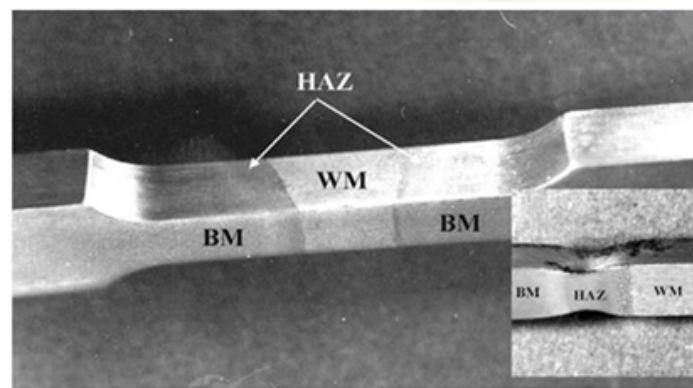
Specimen with weld oriented at an angle to the loading direction [16].
